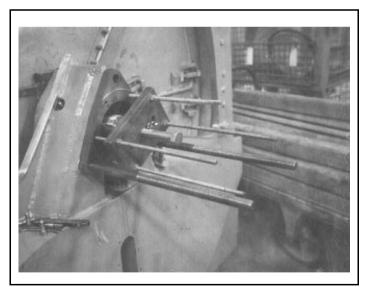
(MSSM0303AE) Bearing Housing Pulling Fixture in Position
